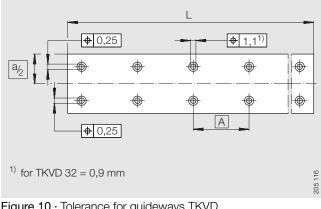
· Tolerance for guideways TKVD, hole pattern to DIN ISO 1101 The parallelism tolerance of the guideways is shown in Figure 11.
